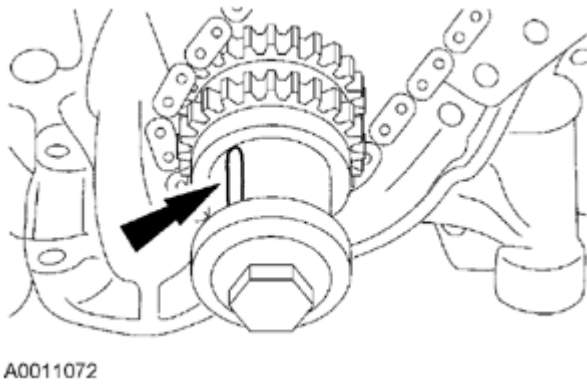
Locating Crankcase Keyway In 11 O'Clock Position
